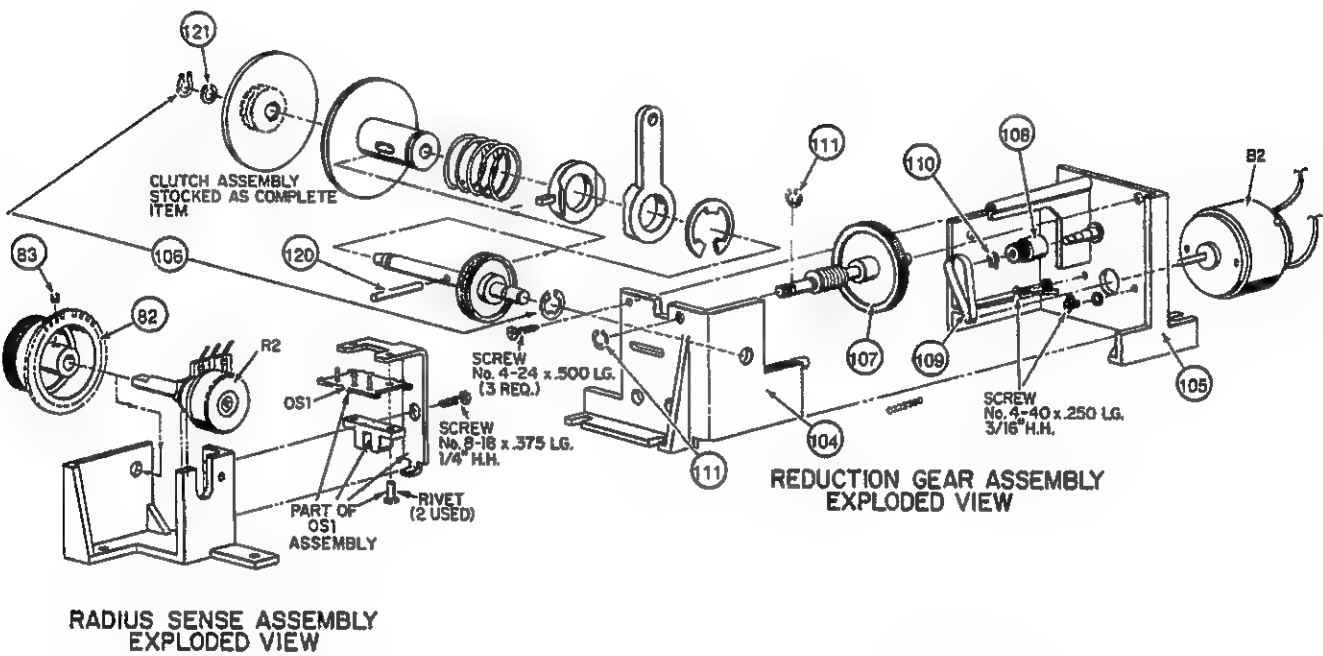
Radius Sensor And Reduction Gear Assembly Exploded View
